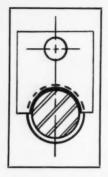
The spring steel retainer shown in this sketch has a semi-circular opening which fits over the screw body and half its circumference with a small clearance.
